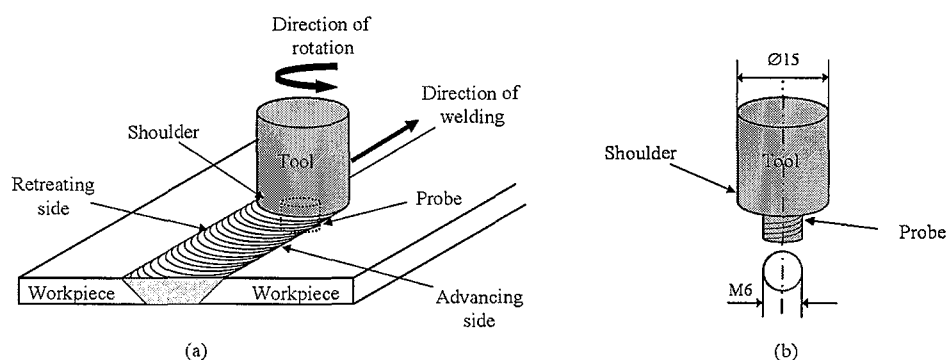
Schematic diagram of friction stir welding (a), and (b)
